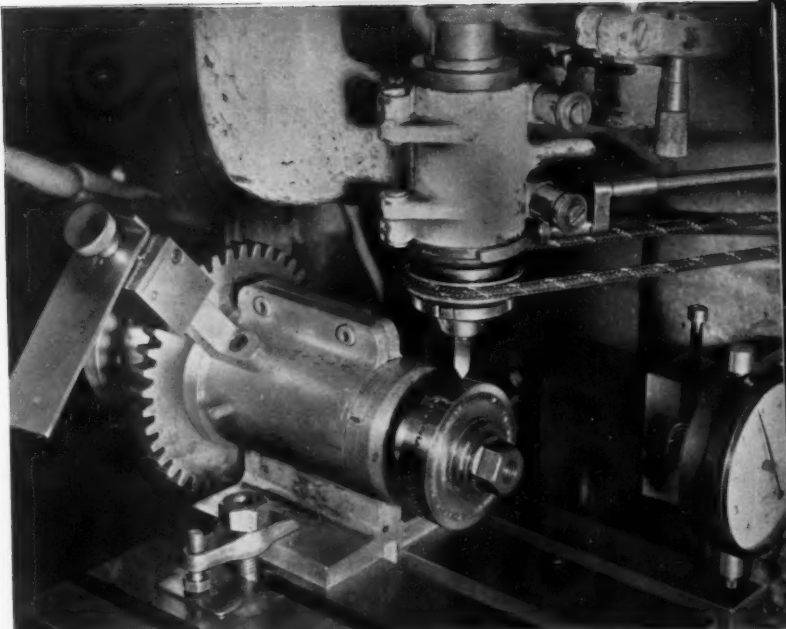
Slitting saw held on arbor in lathe collet is employed to separate embossed cups into four equal sections. The work-holding fixture is manually indexed.
